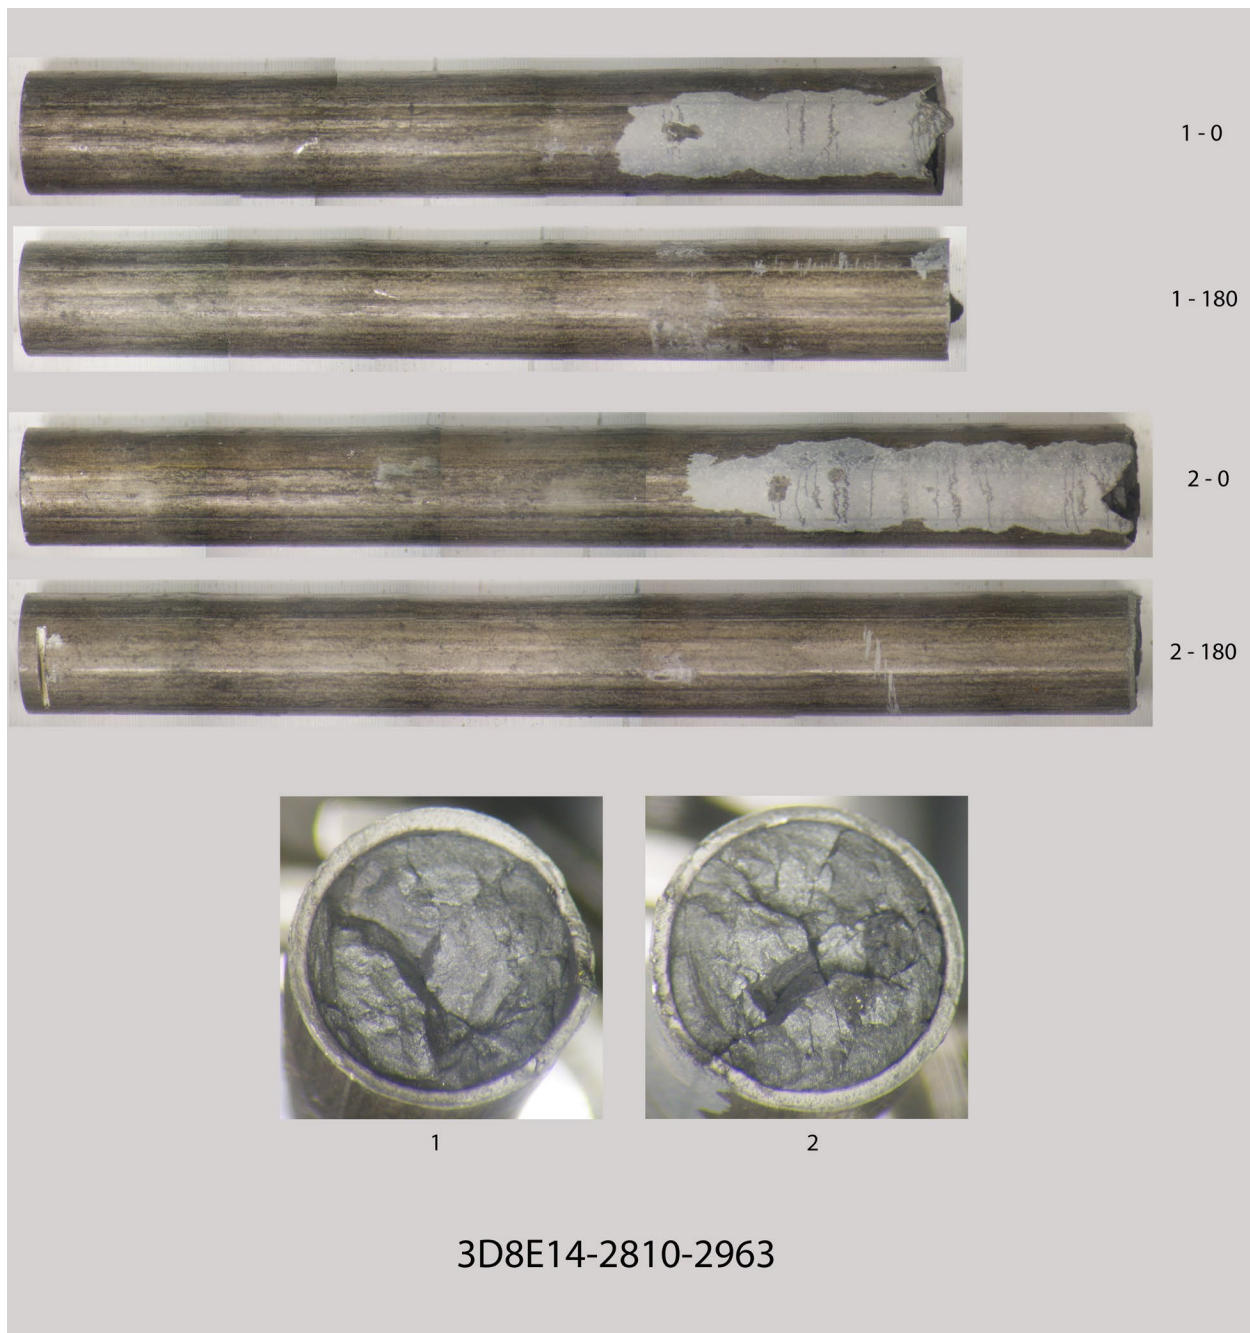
Outer surfaces of the test rod following the aerosol collection 4PB test. The fracture occurred in the body of a pellet, producing coarse debris consistent with past 4PB test results seen at ORNL.
